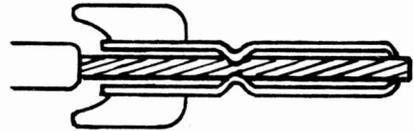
Coaxial plug inner connector with pin pinched at the base to grip the inner conductor.
